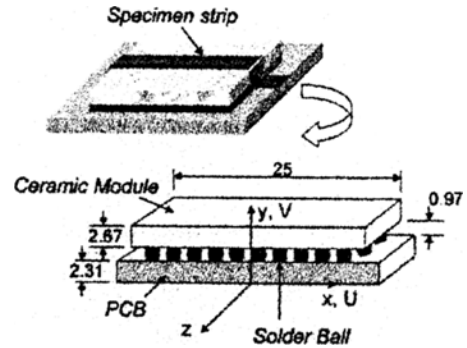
Schematic diagram of the ceramic BGA package assembly geometry with relevant dimensions (mm)
